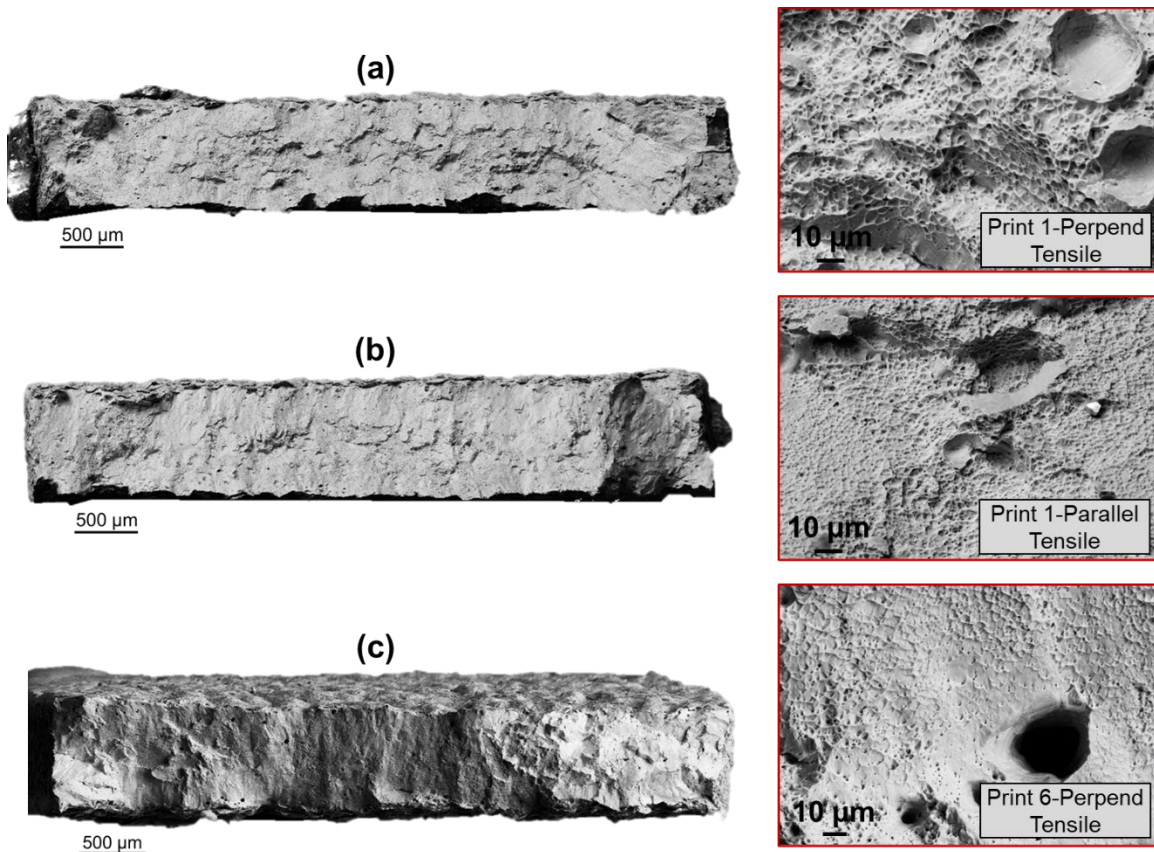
Fracture surfaces of LP-DED NASA HR-1 for (a) Print 1-perpendicular, (b) Print 1-parallel, and (c) Print 6-perpendicular specimens.
